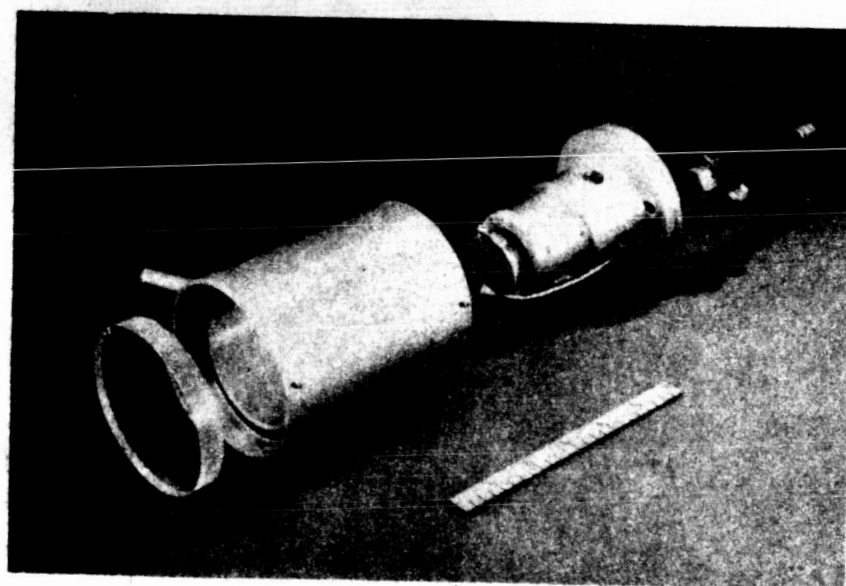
Exploded View of Vacuum Cage with Piston-Type Test Modulator
